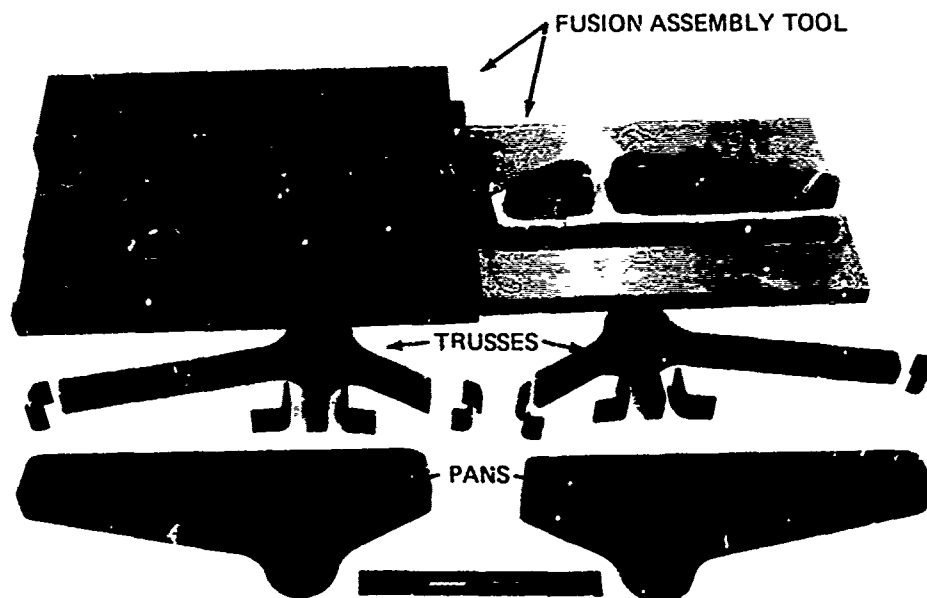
Molded Fitting - Detail Parts and Fusion Assembly Tool
